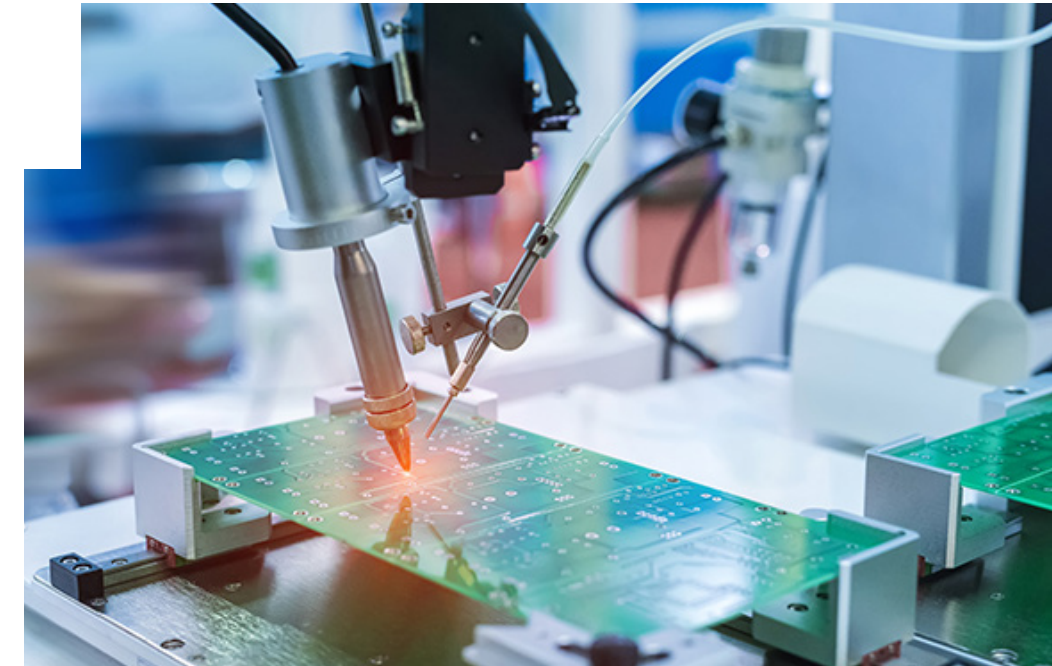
Robotic end effectors can take the form of soldering iron tips to automate the assembly of subcomponents onto PCBs. (Image source: Dreamstime)
